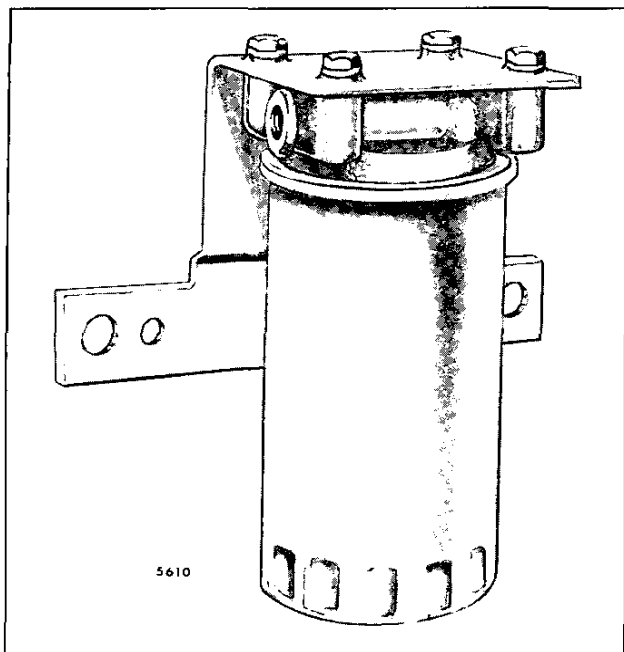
Coolant Filter and Conditioner (Spin-On Type)
